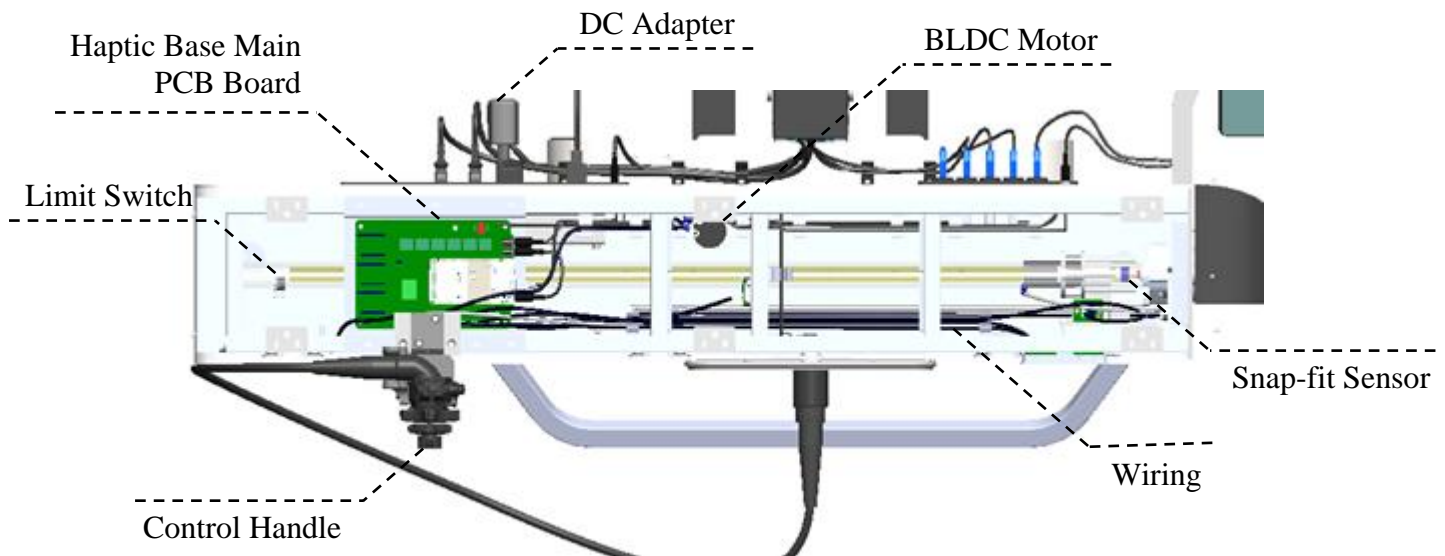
Haptic Base Representing PCB Boards and Electrical Components
